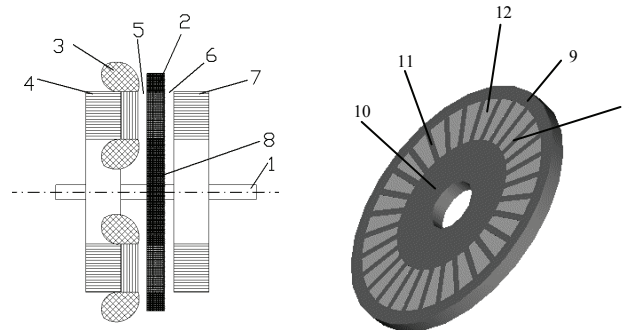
AFIM, in which there is a shaft (1) rotating with respect to the machine frame, and a rotor (2) supported to the shaft. On the first side of the rotor (2) there is a stator (4) supported to the machine frame and comprising a stator winding (3). There is an air-gap (5) between the rotor (2) and the stator (4), and the corresponding air-gap (6) on the other side of the rotor. (7) is an element that conducts the magnetic flux, the element is the rotor yoke (7) that is fixed with respect to the frame. The rotor yoke (7) is fabricated from laminated electrical sheet. The rotor frame plate (8) is machined of work-hardened, rolled sheet of suitable aluminium alloy. The rotor parts (8), (9), (10), (11), and (12) are presented in Fig. 1.9. This AFIM construction is patented by AXCO Motors (2004).
